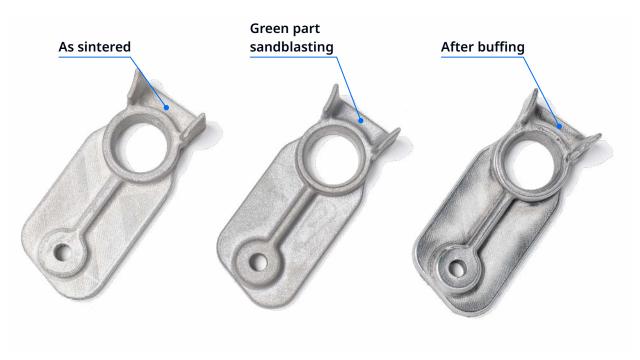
Results of different surface finishing for Liebherr Components' assembly tool
